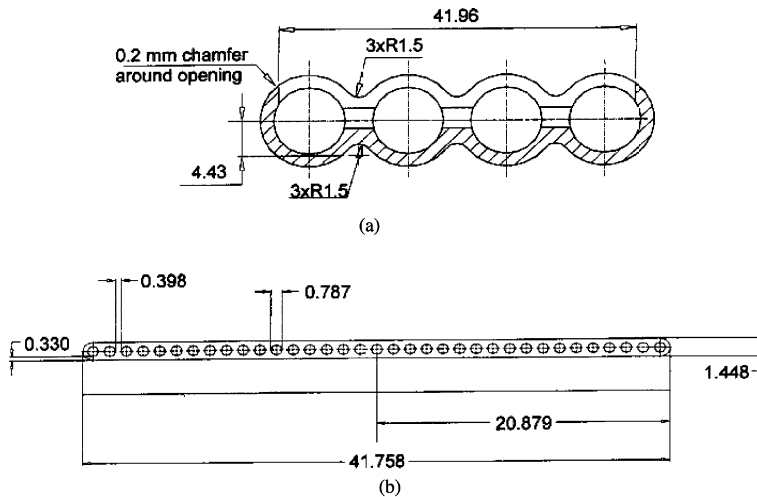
Cross-section of the header pipe and microchannel tube of a prototype CO₂ evaporator for a car air-conditioning system [76]. (a) Cross-section of header pipe, (b) flat microchannel tube.
